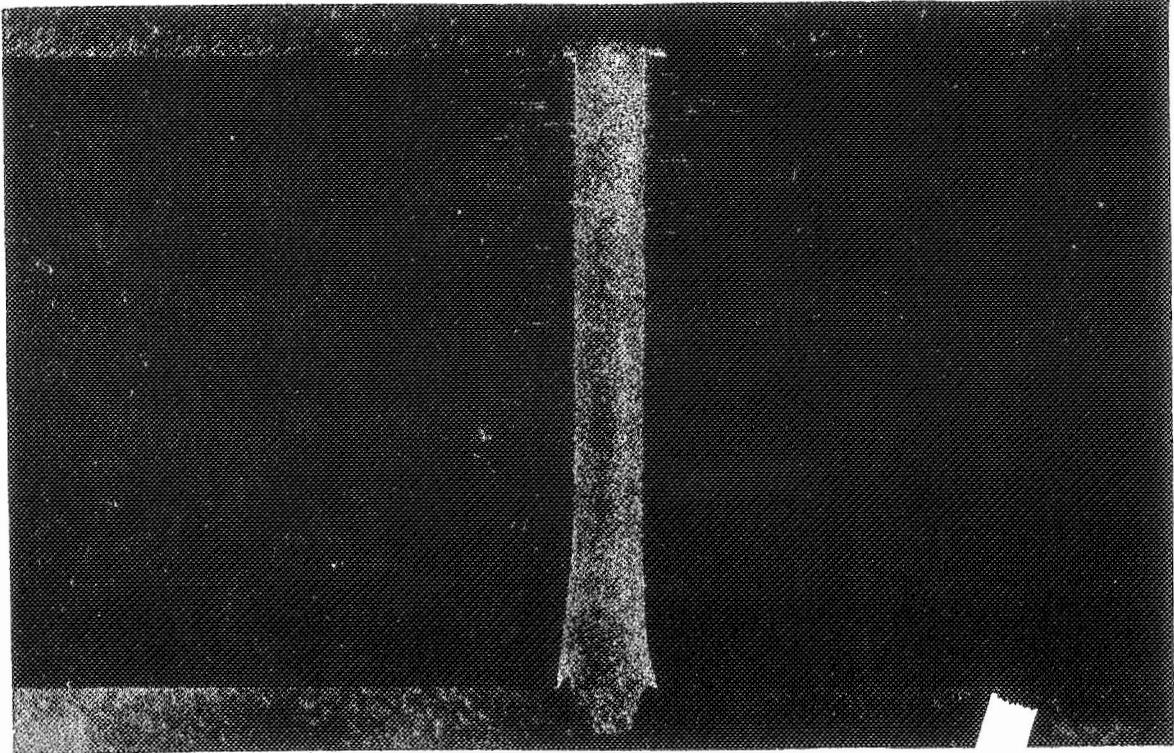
Butt Weld $\frac{1}{2}$ -Inch Aluminum
